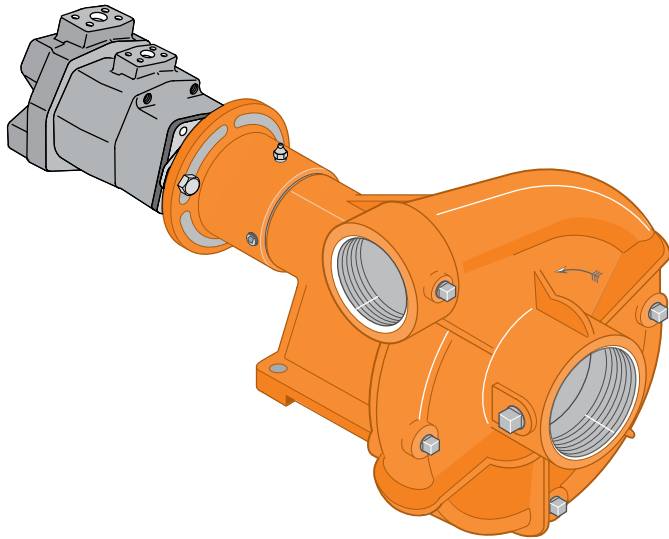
Hydraulic motor drive kit on Model B3ZRM pump
